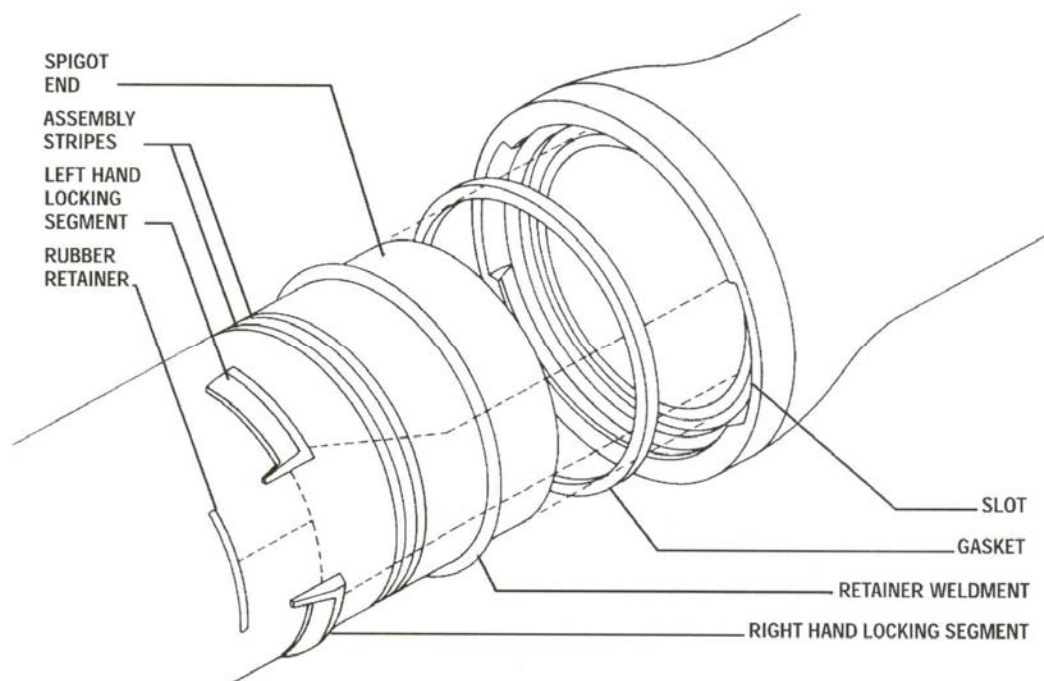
U.S Pipe TR FLEX[®] Joint⁽²⁾
